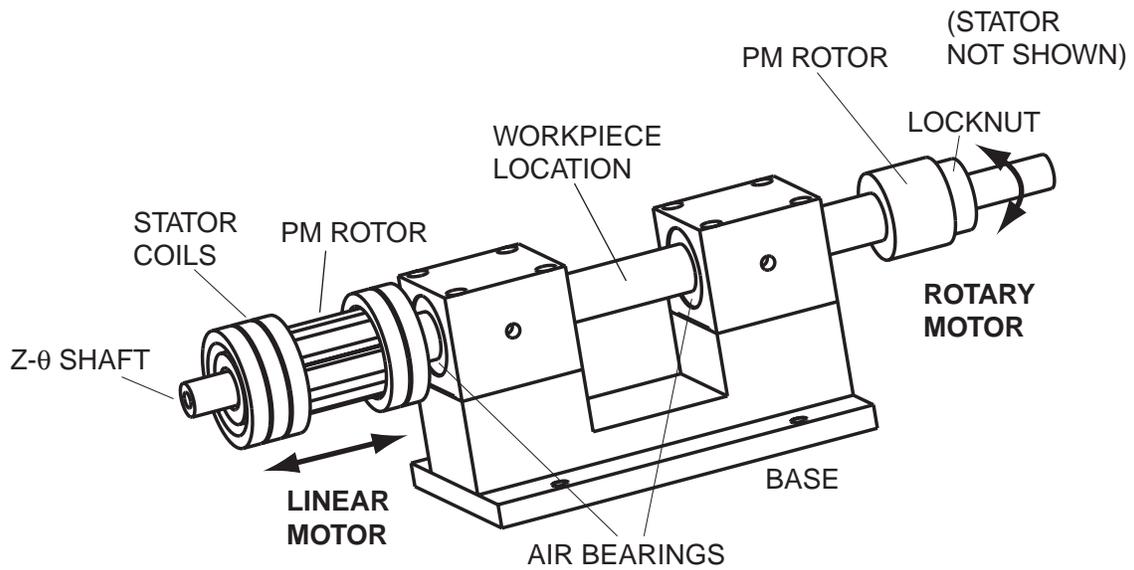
A rotary-linear hybrid axis. The central shaft is mounted in air bearings and has permanent magnet rotors for linear and rotary motors attached to it.
